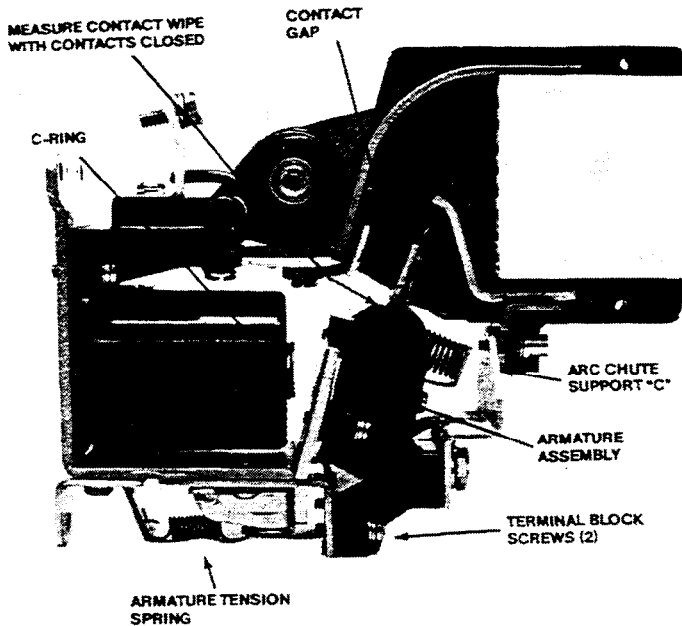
DS303B3A Contactor – arc chute half removed to show detail.
